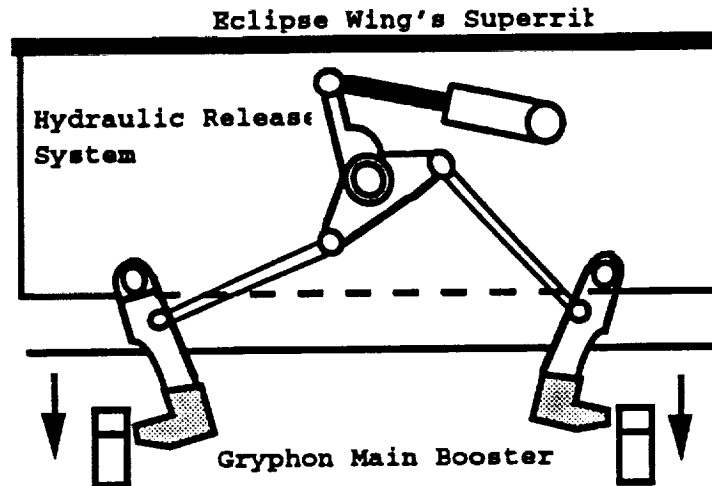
Side view layout of release mechanism geometry (after release)
